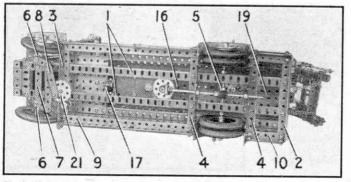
Underneath view of the fire engine showing the drive to the rear wheels and the steering gear.
